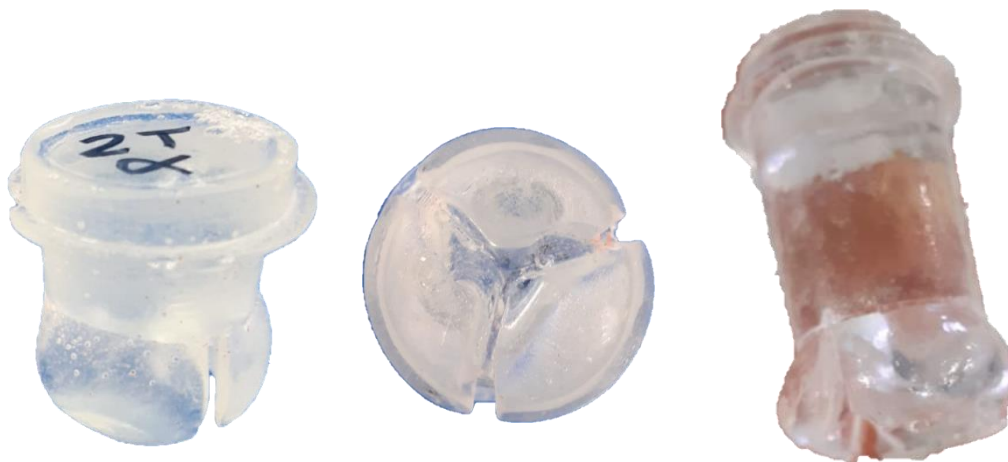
Custom Inner Molds. On the left for preliminary AR in frontal view and top view to show the cavities, molds of the calcific patterns. On the right custom inner mold for the final AR.
